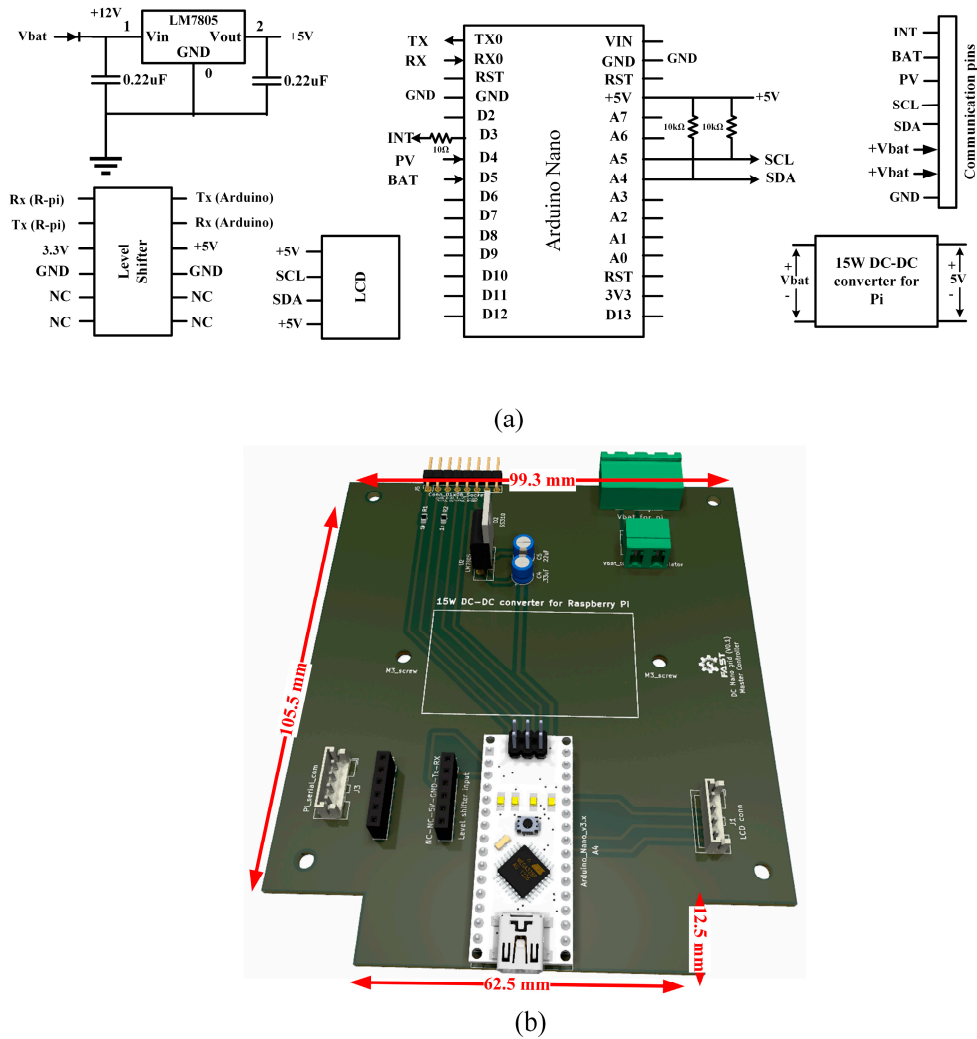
(a) Schematic of Master controller, (b) 3D assembled PCB of master controller.
